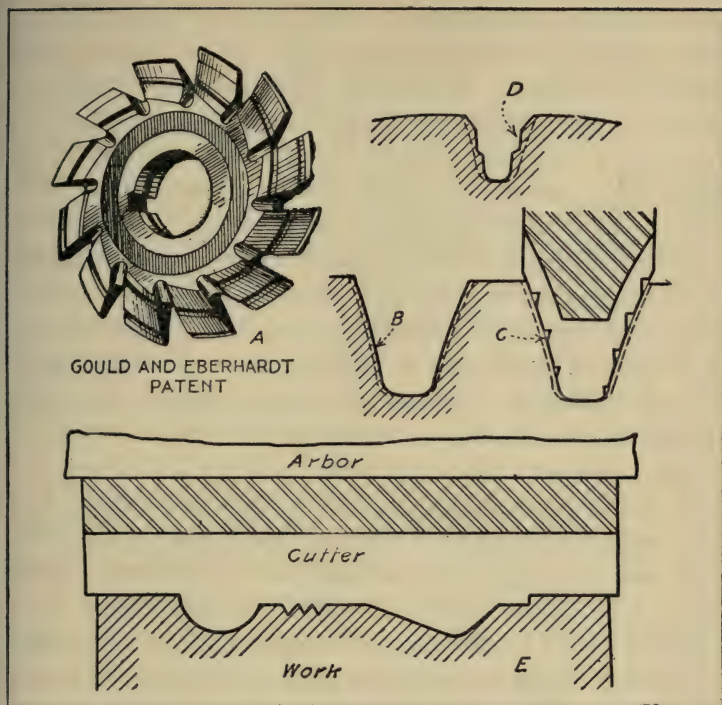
GEAR-TOOTH CUTTERS AND FORMED CUTTERS
